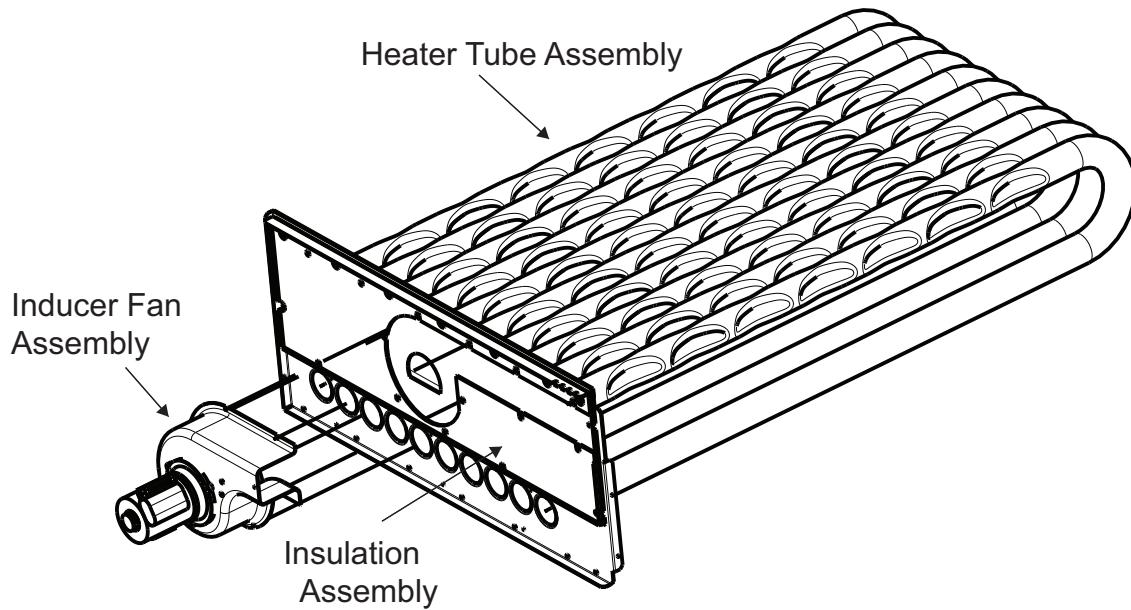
Typical Heat Exchanger Assembly Size 16
